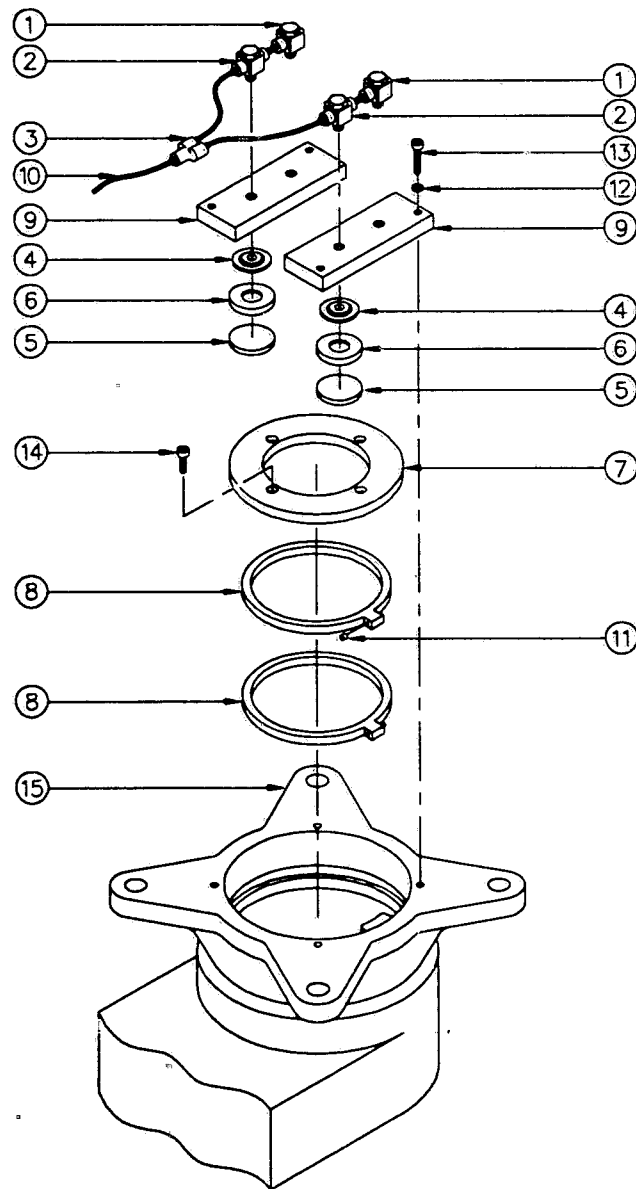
Rotational Stop and Air Brake Assembly, Bearing Plate — Model 230M
